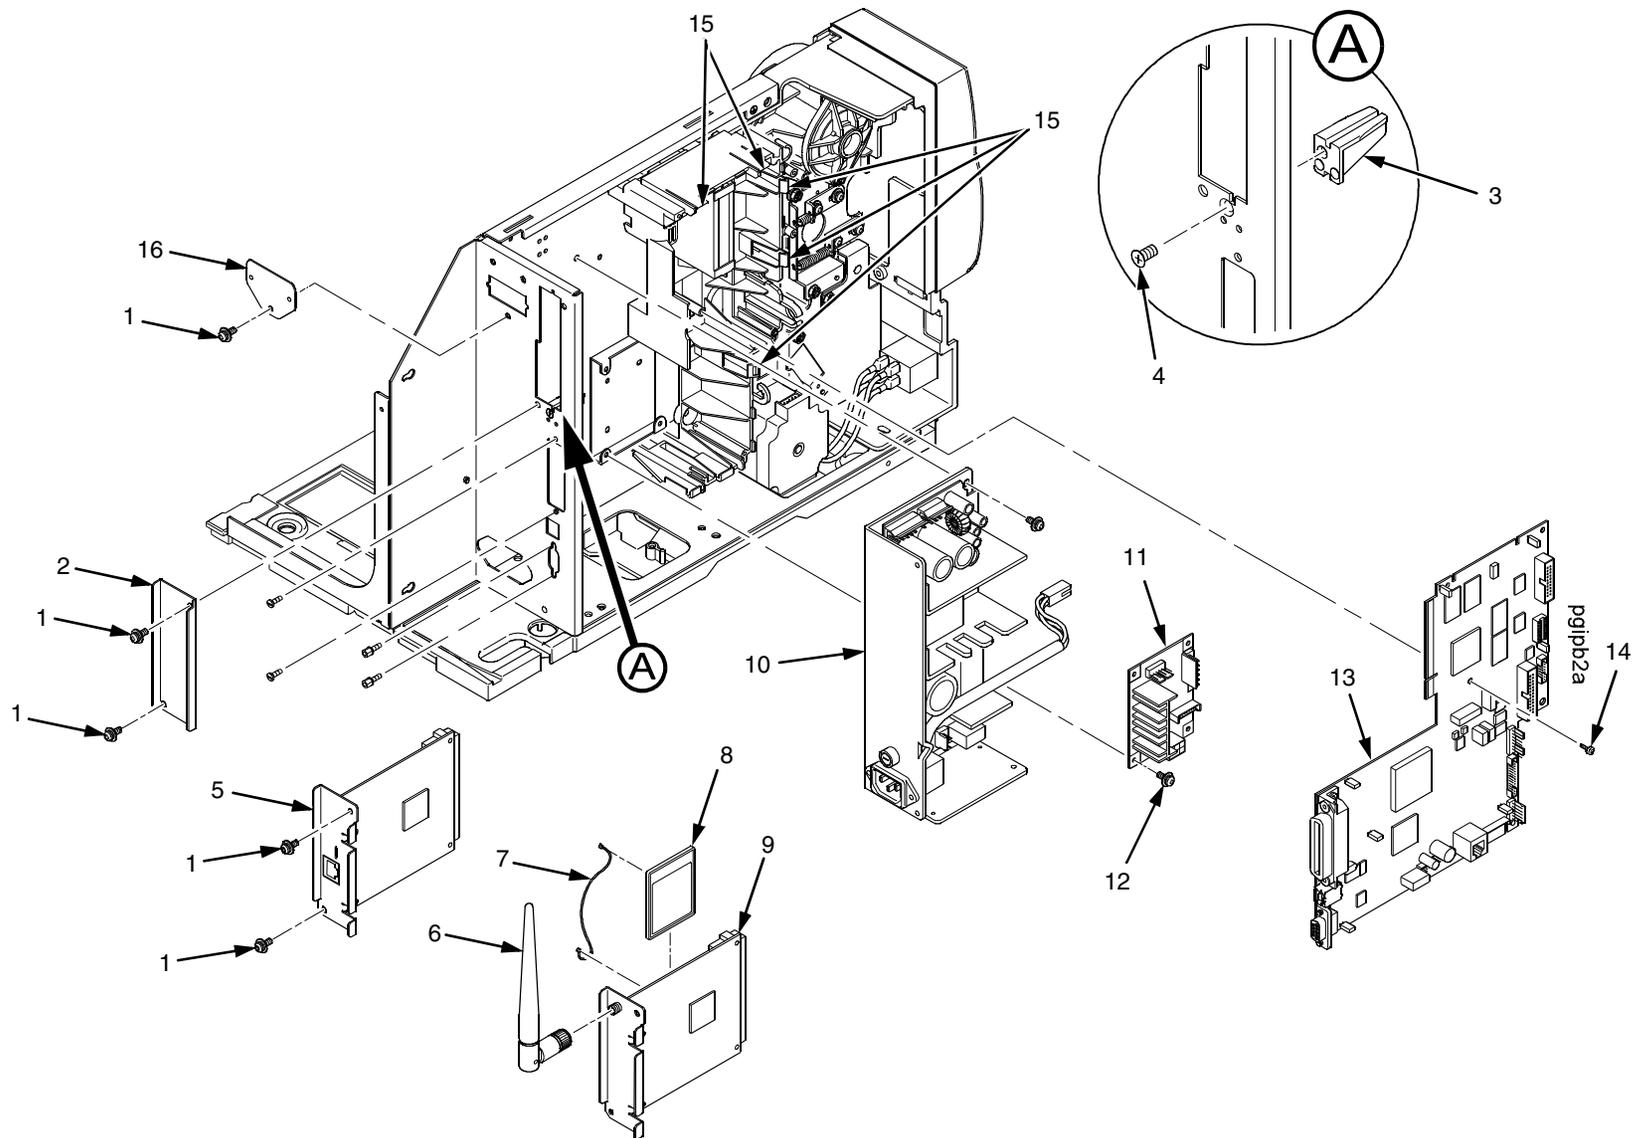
This illustration is an exploded view of the controller board, power supply board, and the ethernet interface assemblies.
